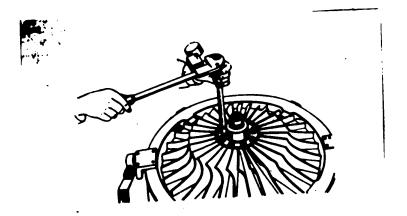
Places for Testing Compressor Rotor Shafts Play
